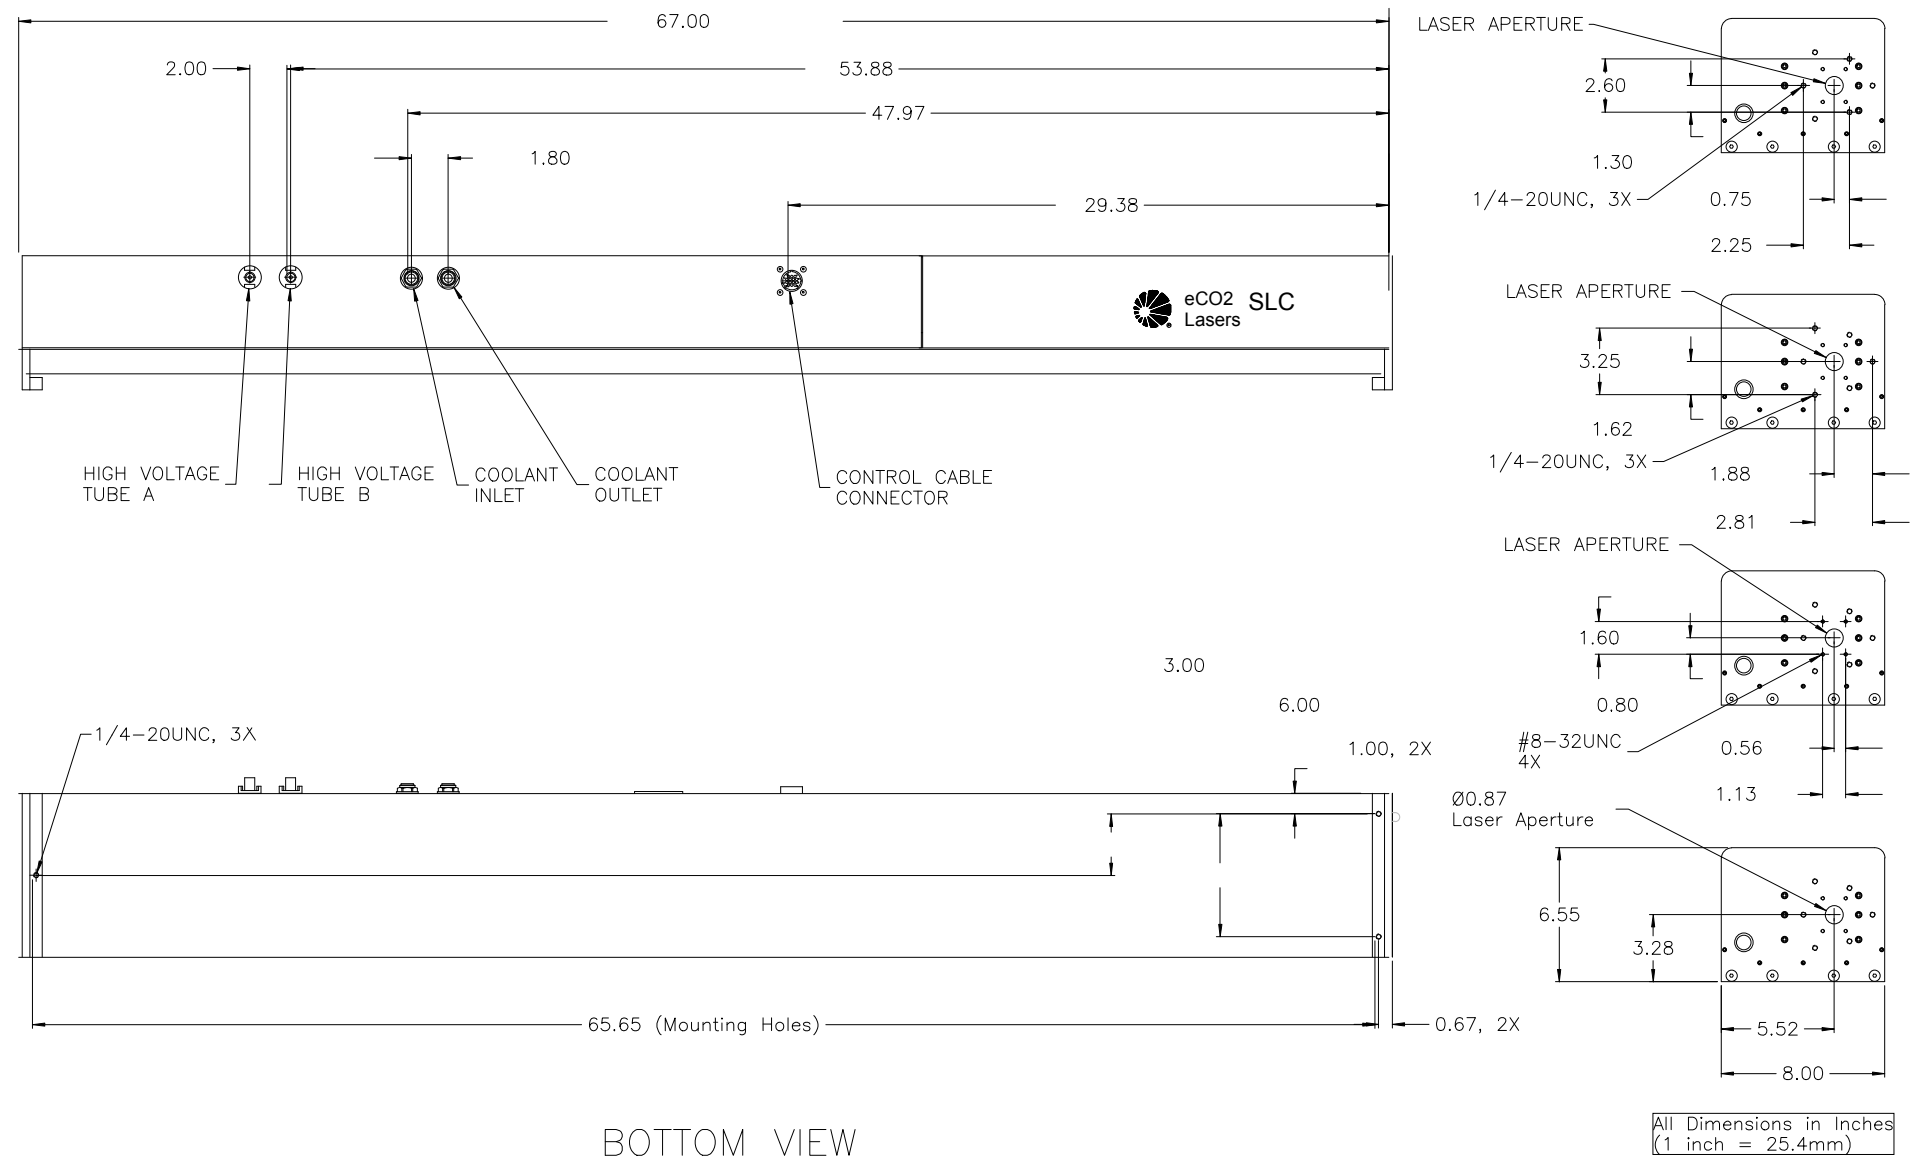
Envelope and Mounting Dimensions (SLC200x)
